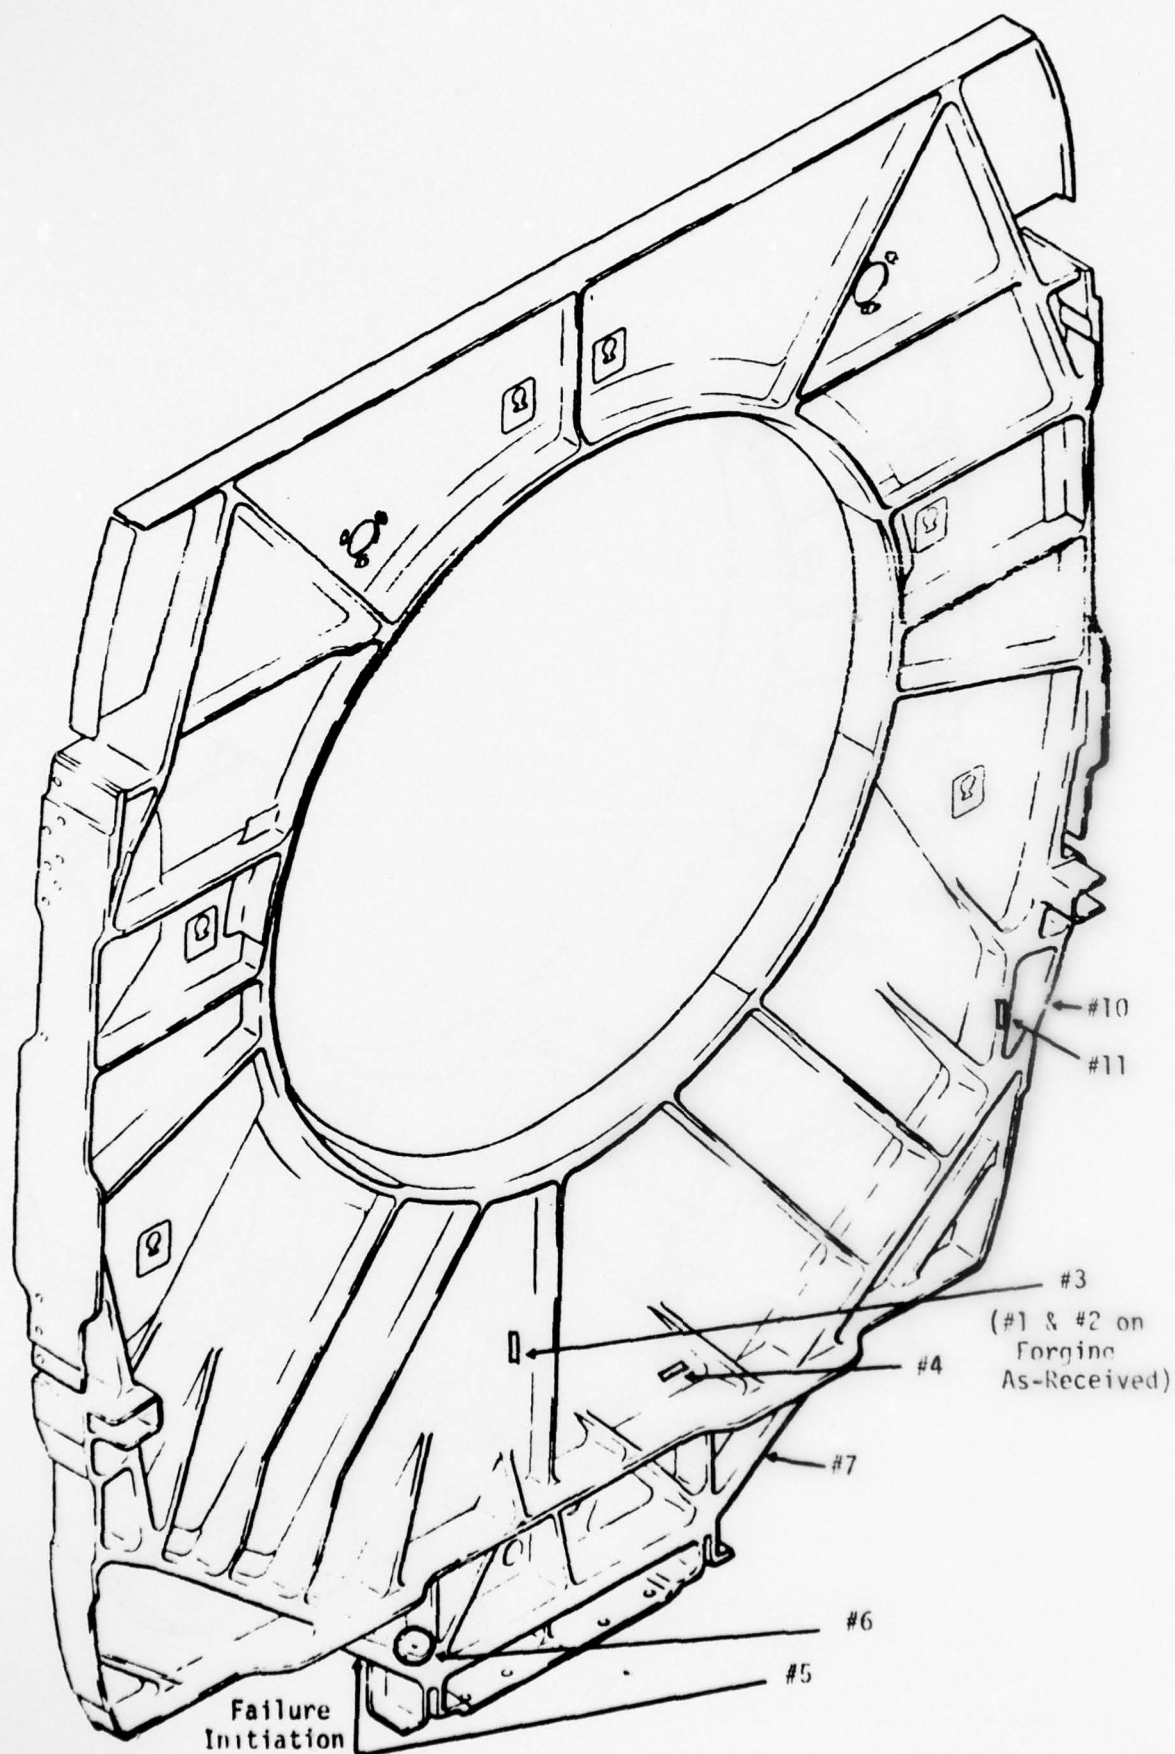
215-30402 BULKHEAD, AFT SIDE, AS-MACHINED.
